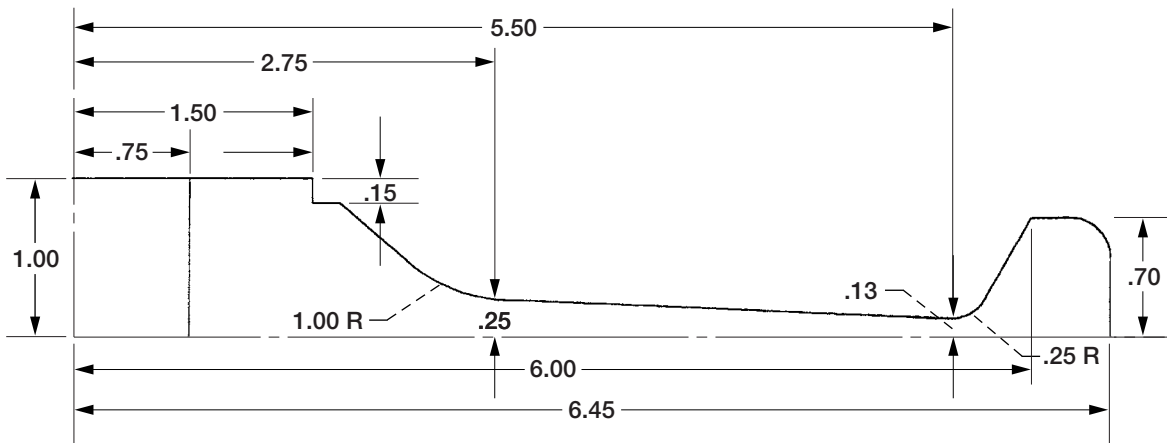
Machining plan for finished disk used in spin testing. All dimensions in inches.
